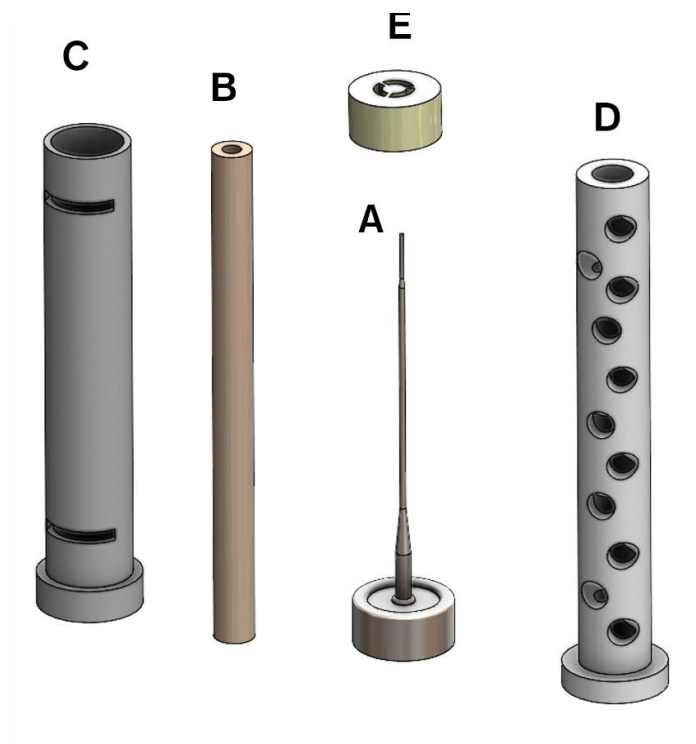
Isopressing tooling assembly with components labeled in the order of assembly. (A) Stainless steel mandrel produced using DMLS. (B) Isopressing jacket made of polyurethane cast in-house. (C) Support jacket made using WaterShed XC 11122 and printed using SLA. (D) Perforated jacket was made using WaterShed XC 11122 and SLA was used to stabilize the pressure application on the setup. (E) Polyurethane lid to seal the assembly and prevent contaminant entry.
